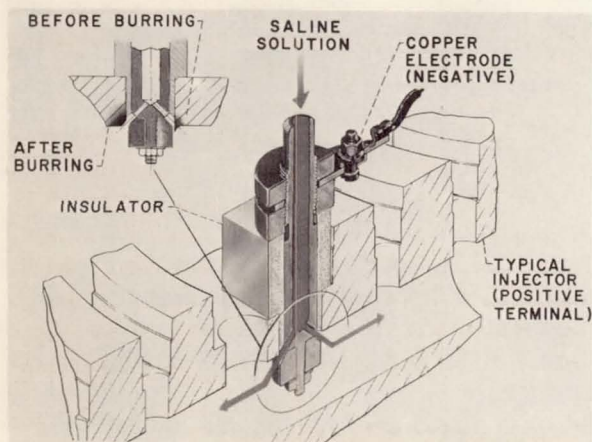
Test setup of burr-removal devices. Electrochemical machining.
